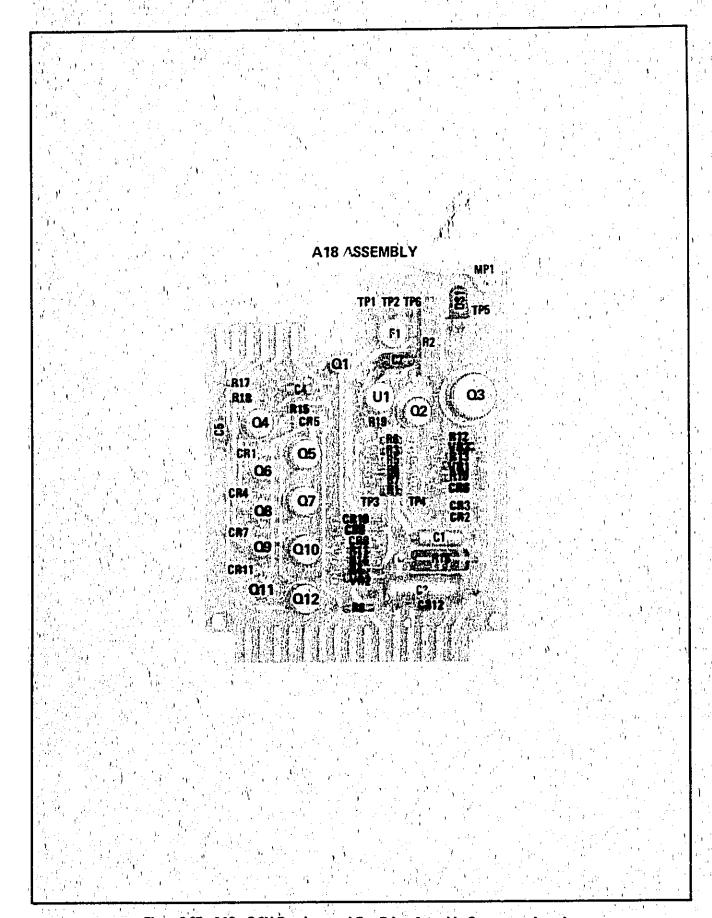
A18 -5.2V Regulator and Fan Driver Assembly Component Locations
